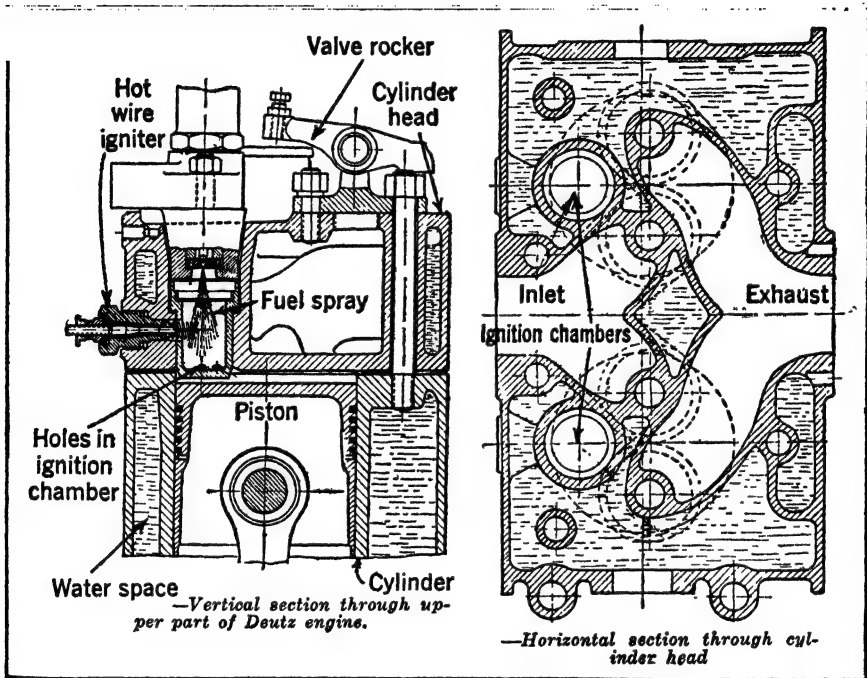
C.—Diagrams Showing Construction of Deutz Diesel Engine.
